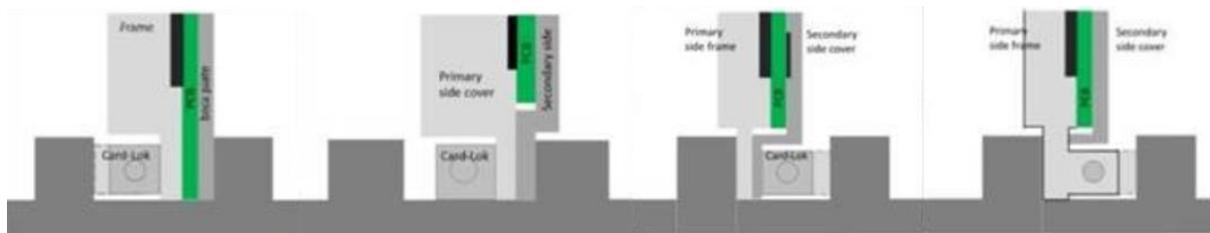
POSSIBLE WEDGELock AND PCB JOINT CONFIGURATIONS
